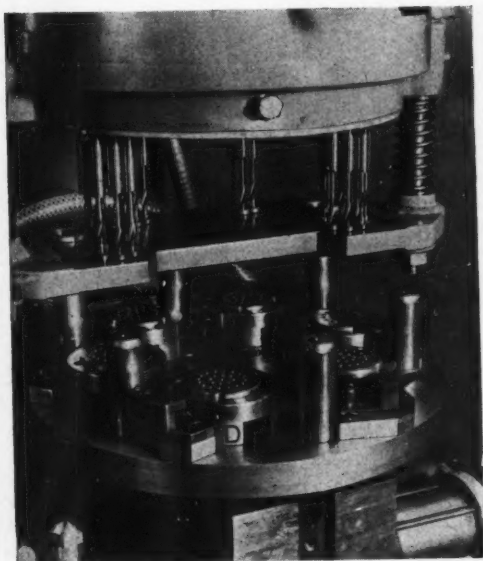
Close-up view of the indexing fixture and the drilling head on the machine shown in Fig. 5
